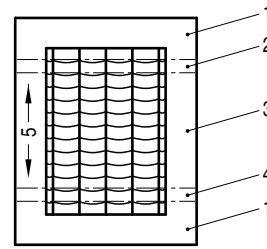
Specimen orientation and testing areas on weld clad test pieces (continued)
